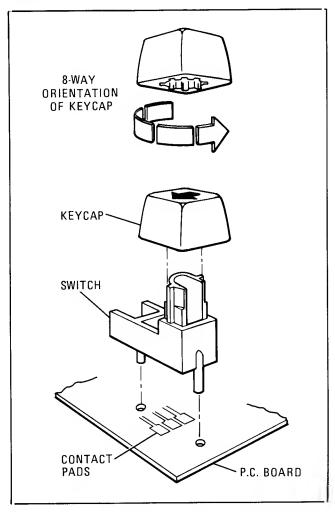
Front-Panel Pushbutton Switch Assembly
